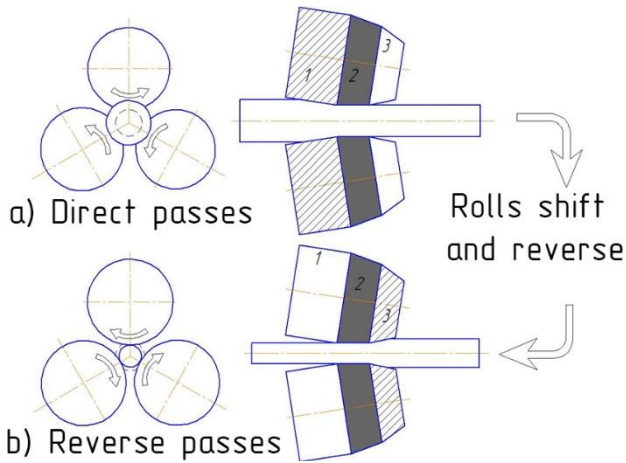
Scheme of reversible radial-shear rolling: 1 – crimping section for direct passes; 2 – calibration section for all passes; 3 - crimping section for reverse passes
